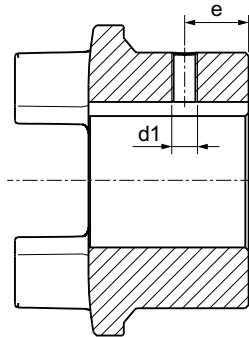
Diameter and axial position of the threaded hole in the hub
